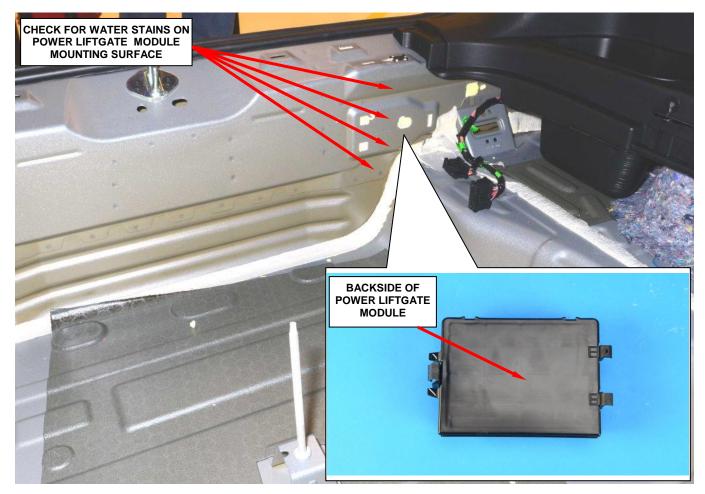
Check for Water Stains on Backside of PLG Module and/or Mounting Surface
